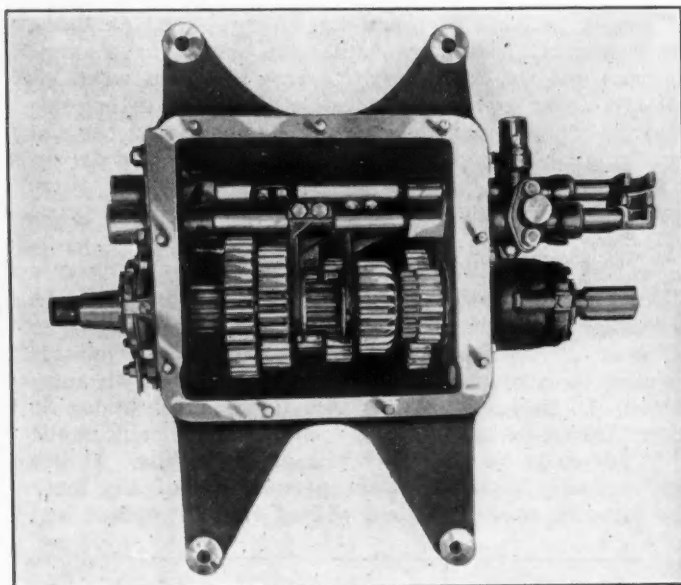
THE FOUR-SPEED GEAR TRANSMISSION
